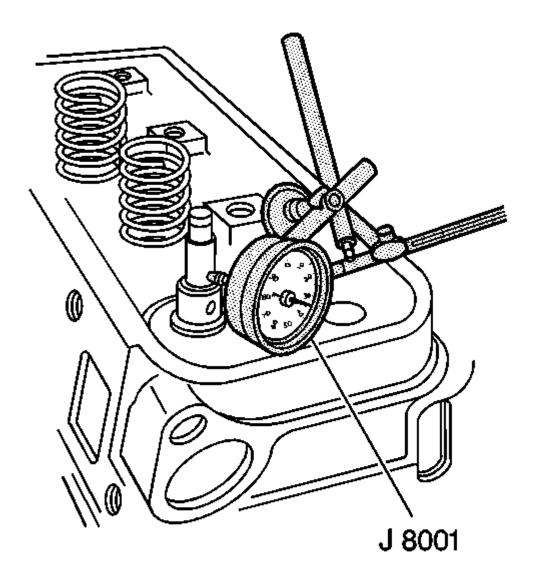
Measuring Valve Stem Clearance Courtesy of GENERAL MOTORS CORP.
